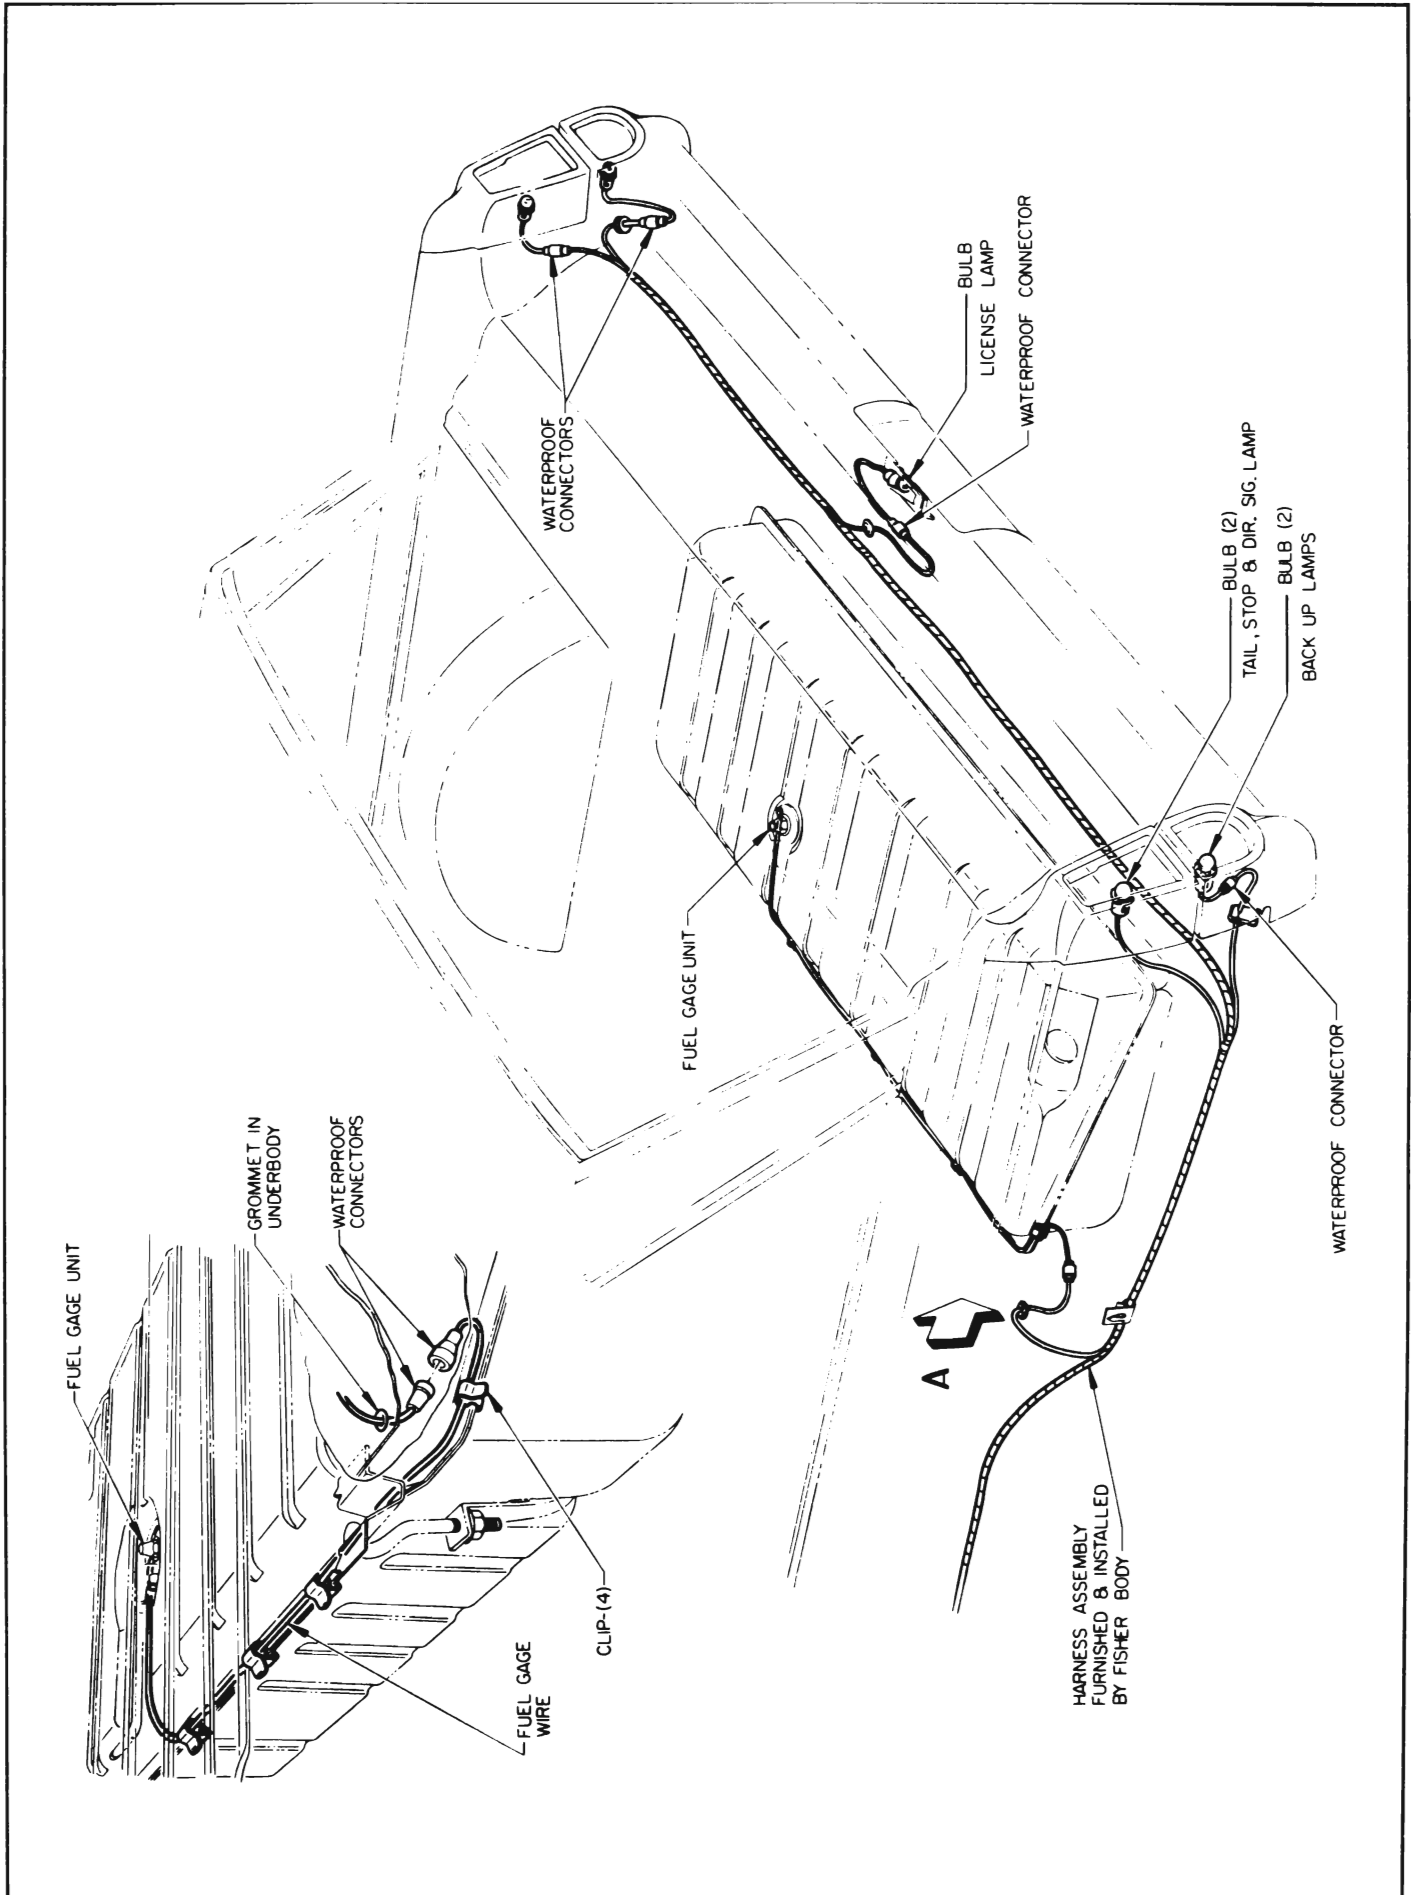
Rear Lamps and Fuel Gauge Wiring—Wagons
